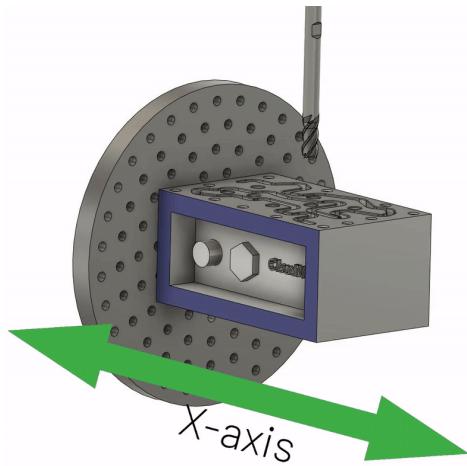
The animation shows different axes on a 4-axis CNC milling machine.[9]
